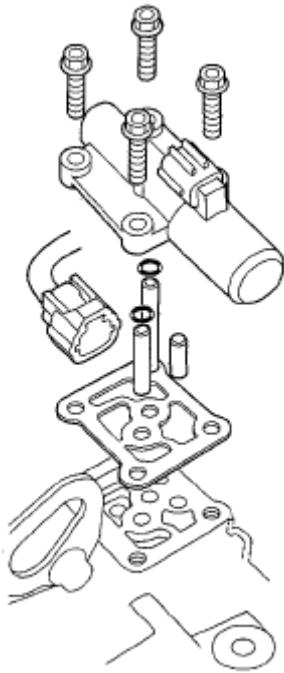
Identifying A/T Clutch Pressure Control Solenoid Valve C
